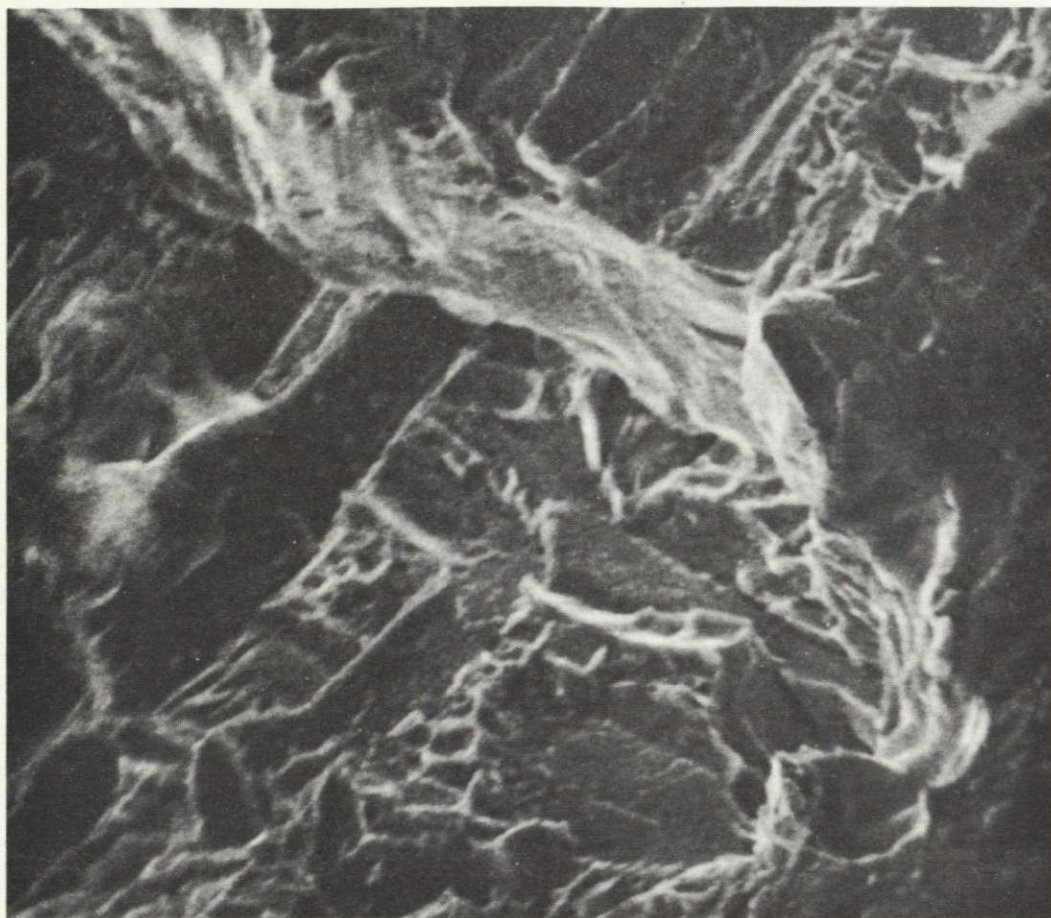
Fracture Appearance of Ti-8Al-1Mo-1V Sheet Specimen
